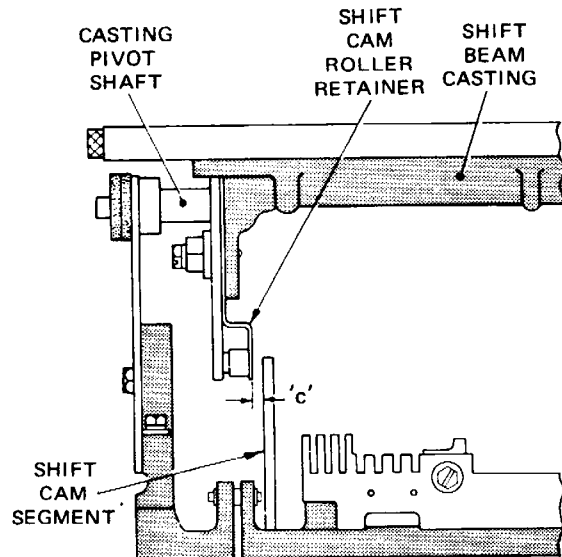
SHIFT MECHANISM (REAR VIEW)
